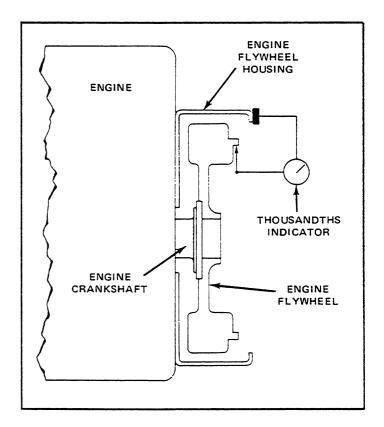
Checking the Driving Ring Pilot Bore of Engine Flywheel.
